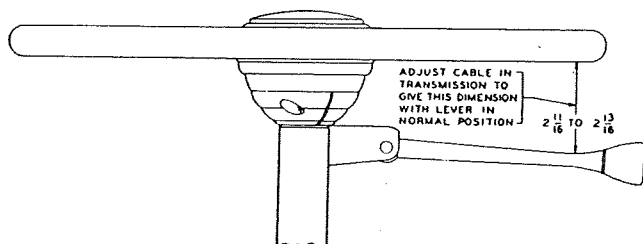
Pontiac 1938. Gearshift Lever Adjustment
